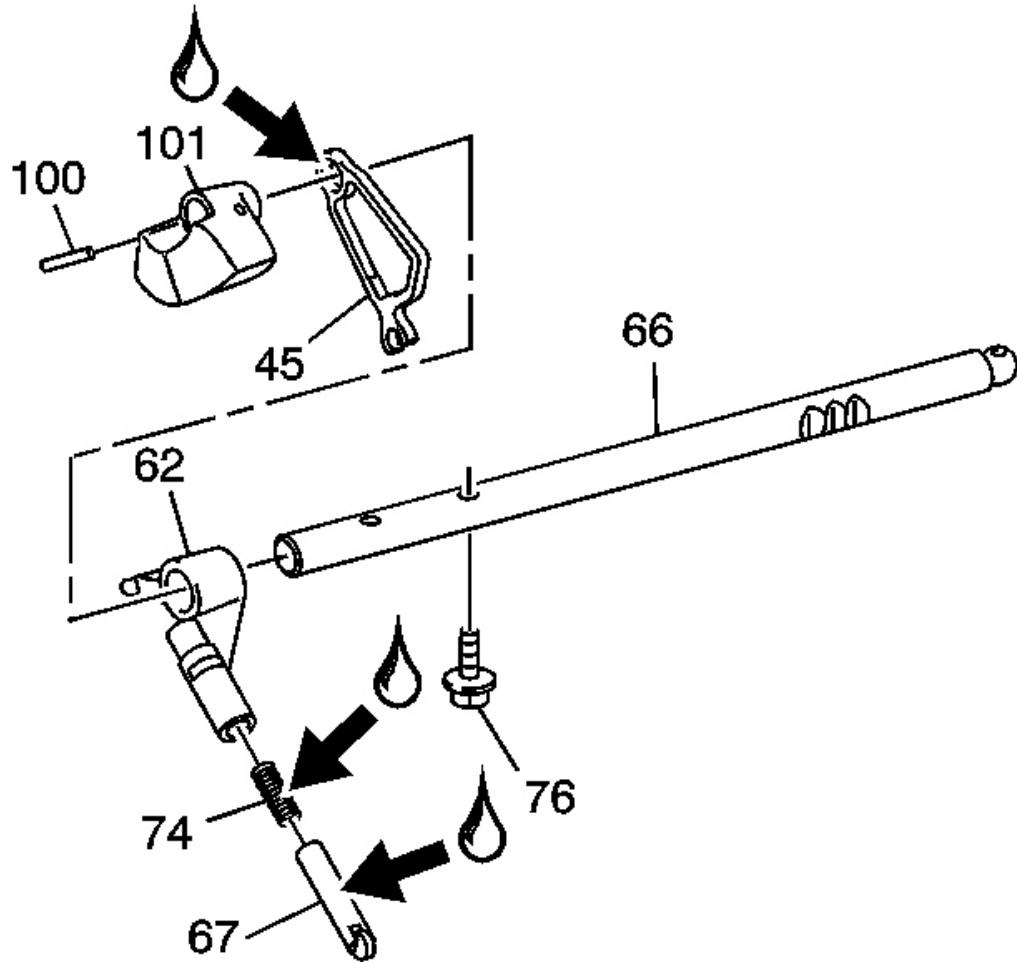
View Of Shift Shaft Detent Lever & Shift Control Shaft Components
